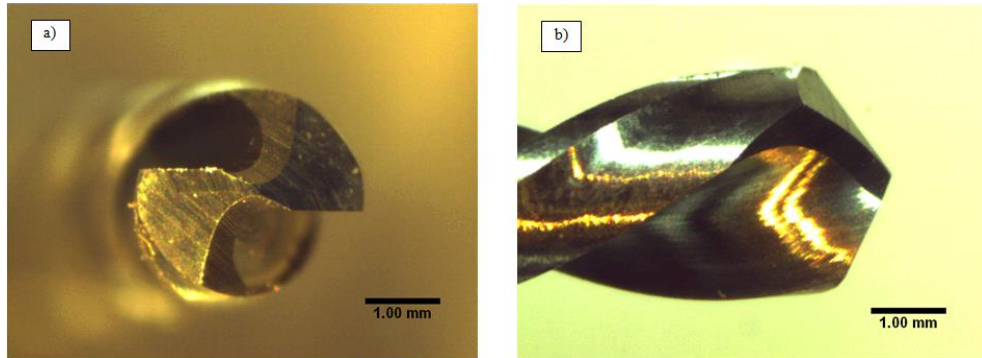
A 3 mm diameter Guhring SL-VHM SPIRALB K 0013915411 solid carbide twist drill. (a) Top view and (b) Side view
